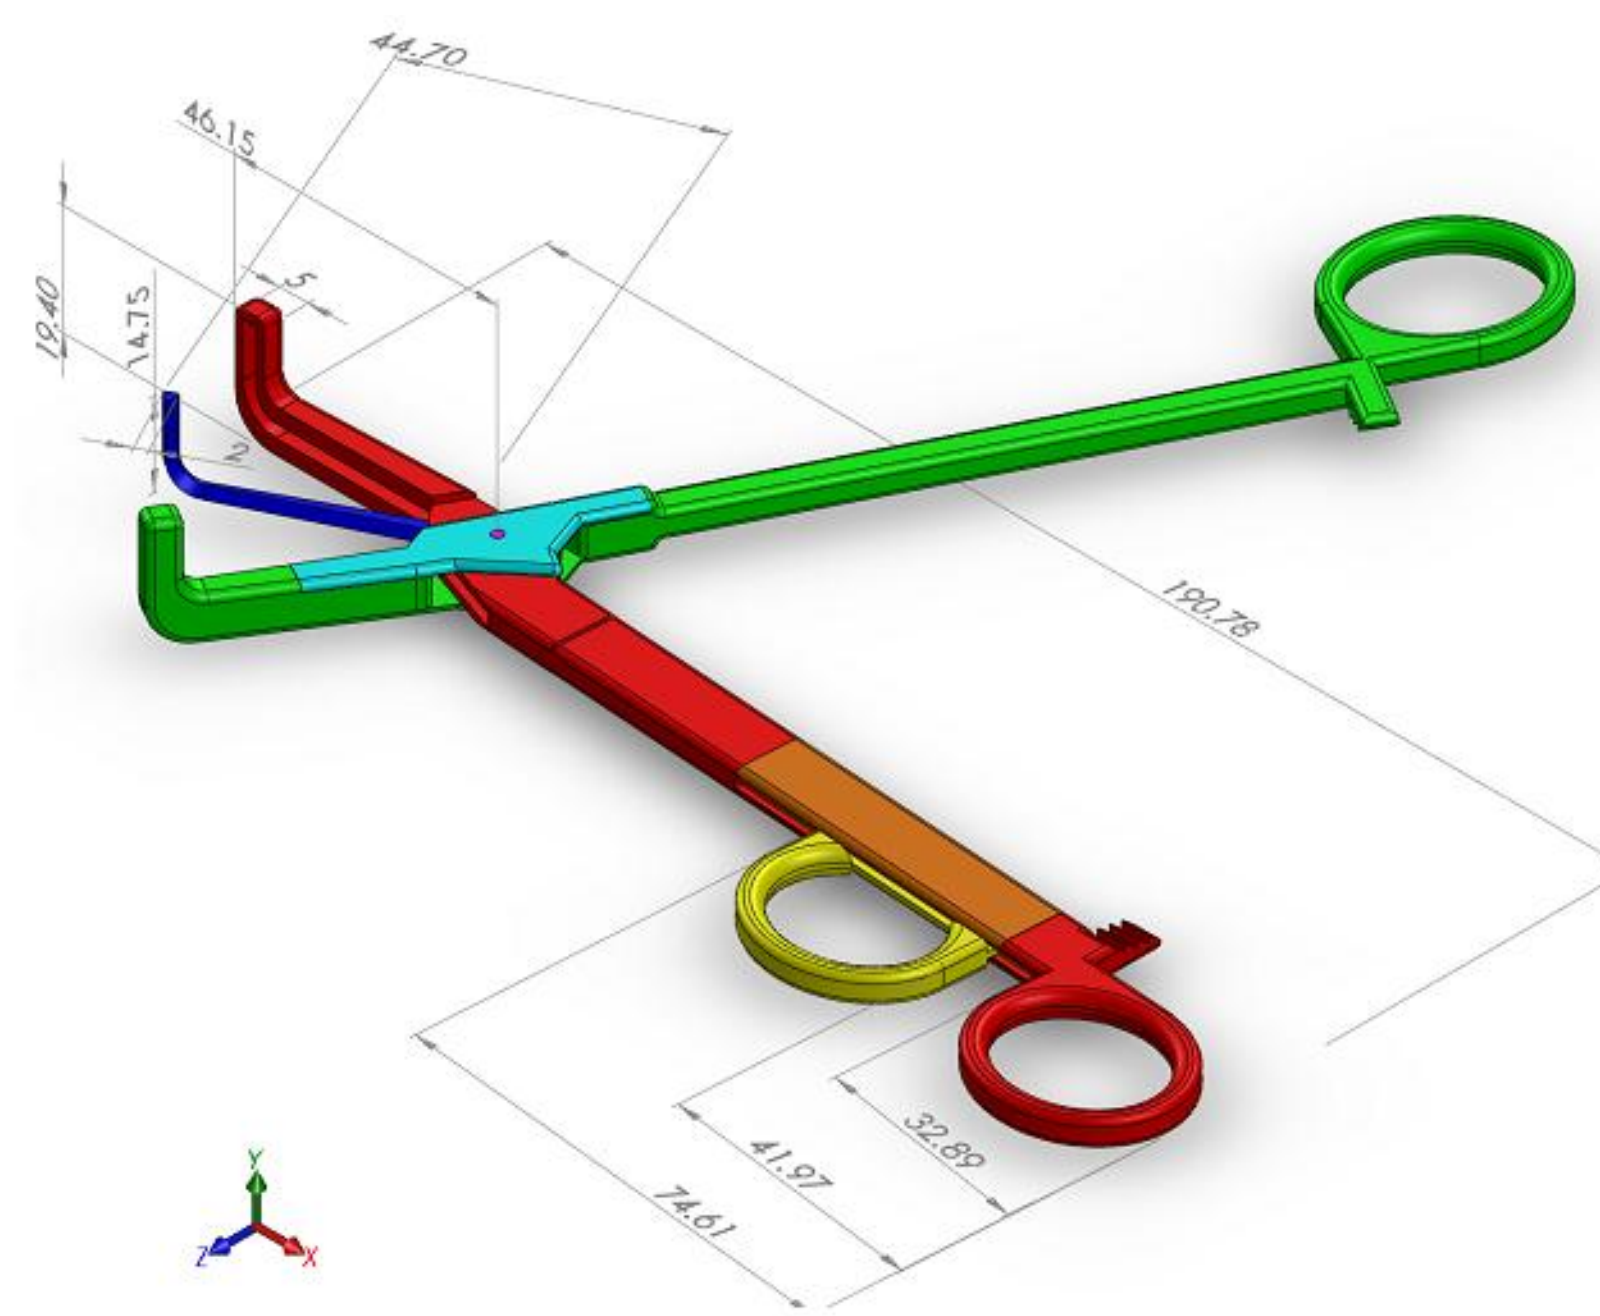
Seven parts, spring, wire assembled, tips open and blade exposed. Note: spring and wire are hidden. All dimensions are in mm.
